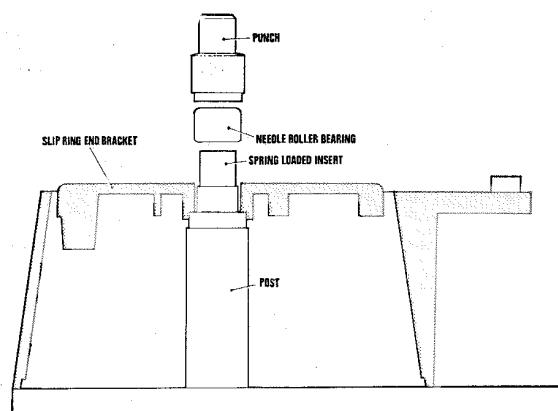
Fitting the needle roller bearing in the slip ring end bracket
